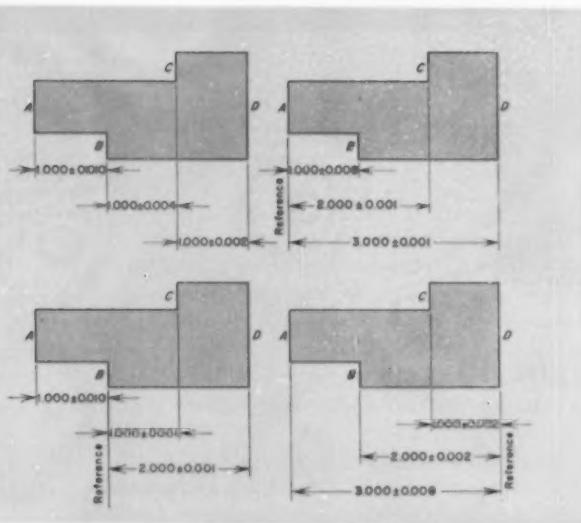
Choices possible in typical part for reference surfaces. Original dimensioning is shown at upper left; optimum dimensioning at lower right.
